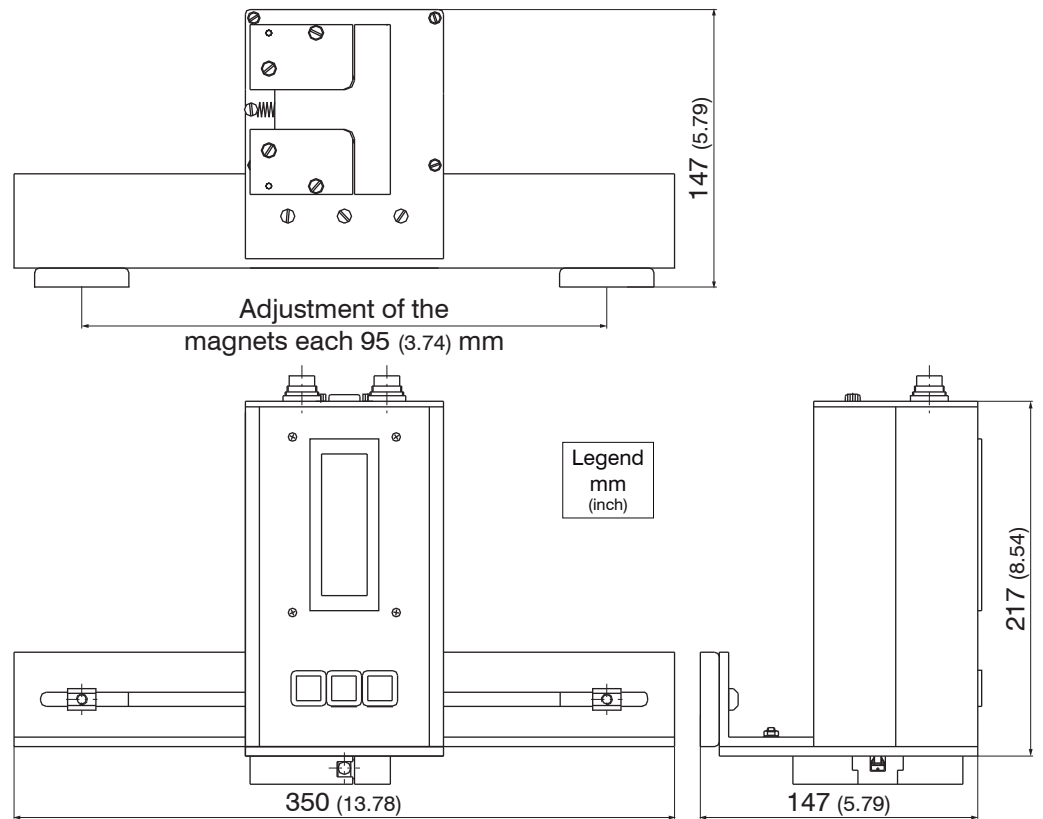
Dimensioned drawing of electronic evaluation unit with positioning system
